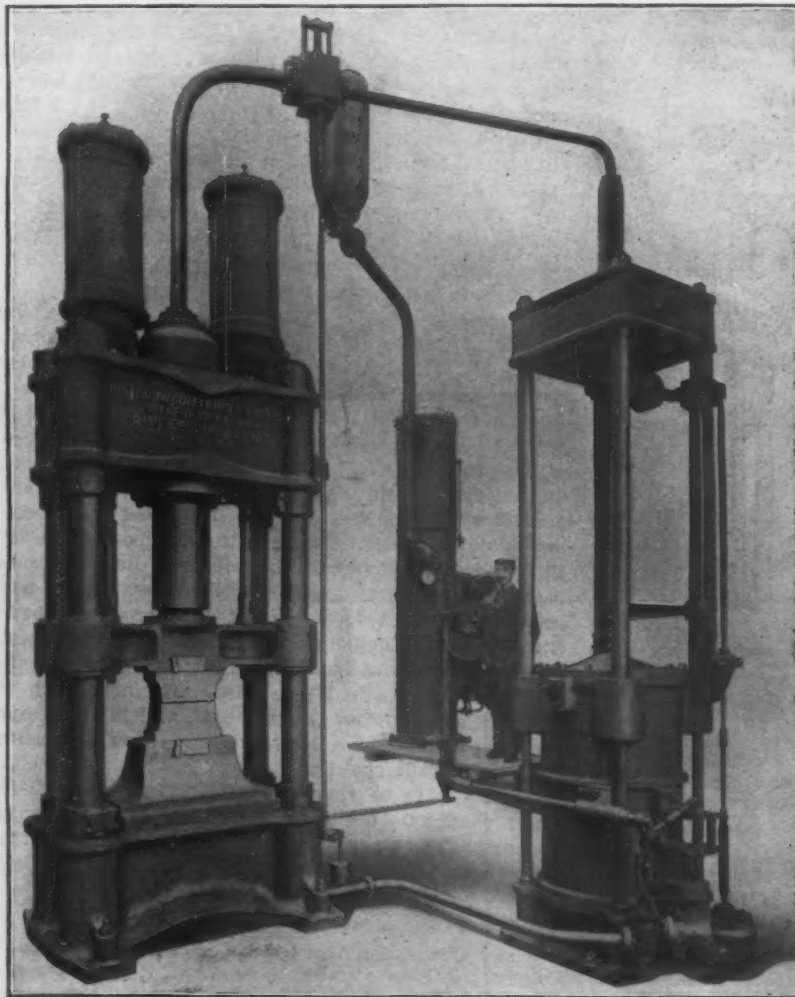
Rapid Action Steam-Hydraulic Forging Press, Four-Column Type with Single Cylinder.
